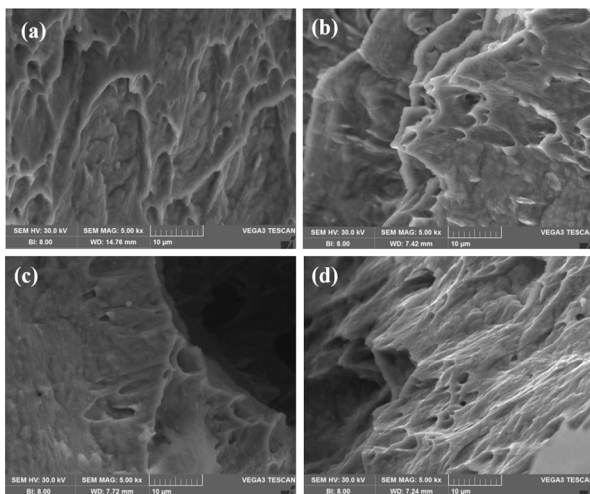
SEM fractograph showing a dimple fracture surface of C22000; (a) Expansion_4, (b) Expansion_5, (c) Expansion_6, and (d) Expansion_7.
